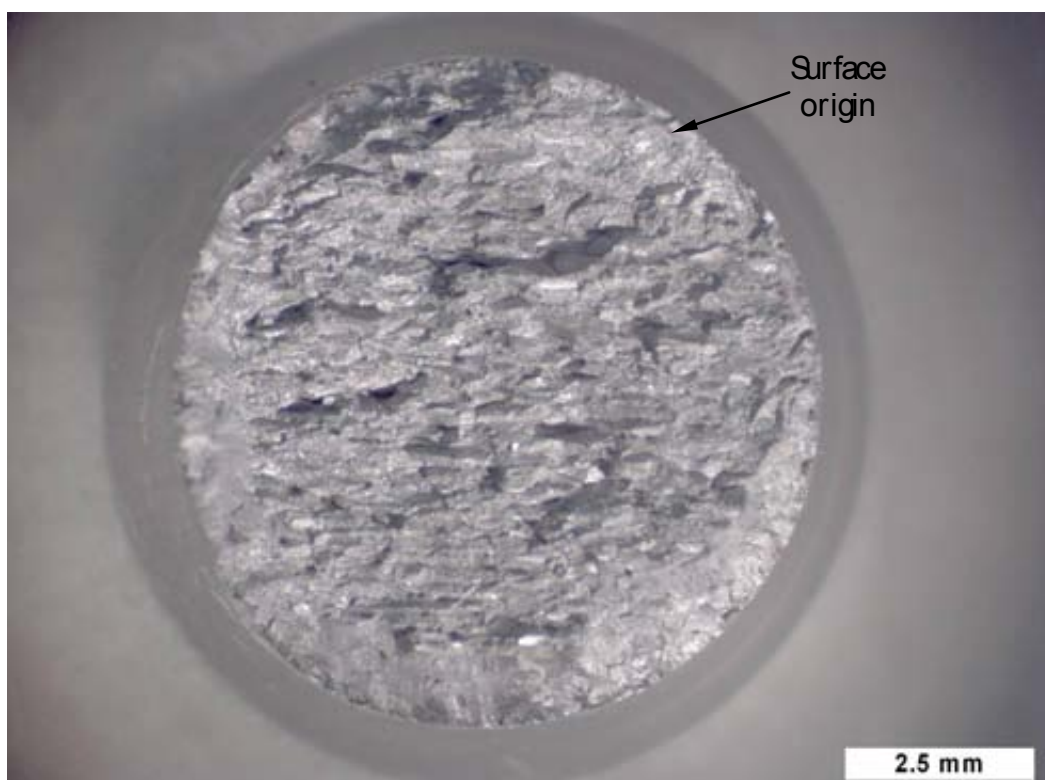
Typical fracture surface of IPC stage 7 disc dwell test specimen showing surface origin and ductile failure [152]
